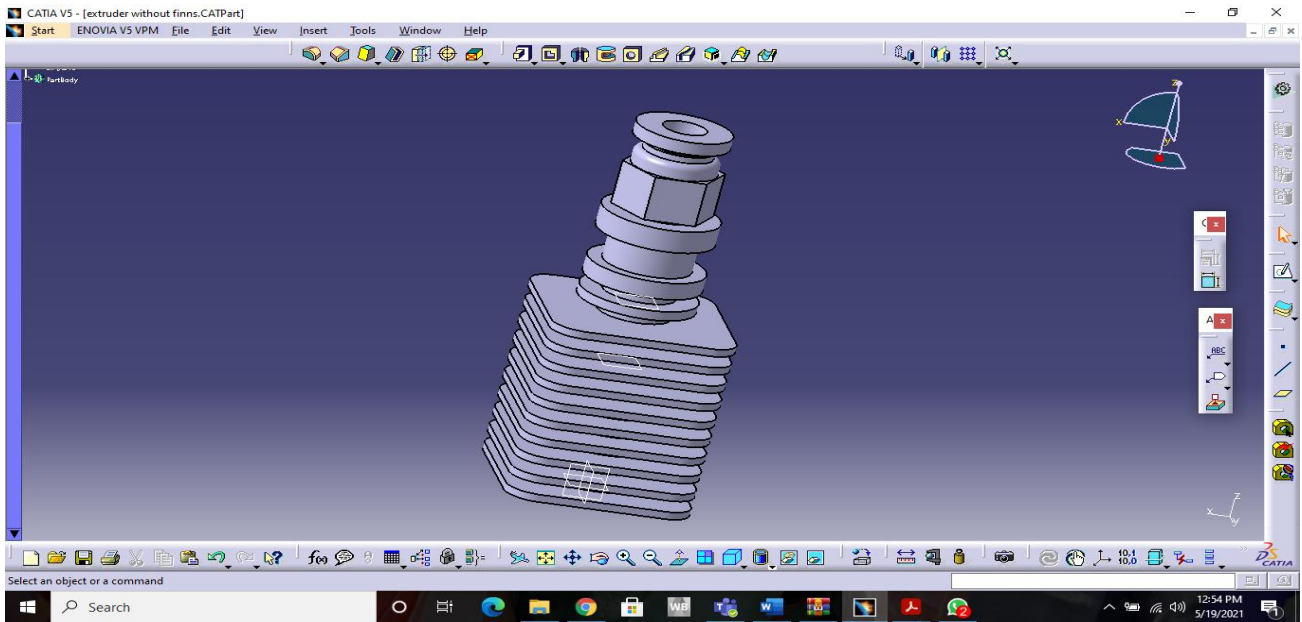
Extruder sink with rectangular(1.2mm thickness) fins.
